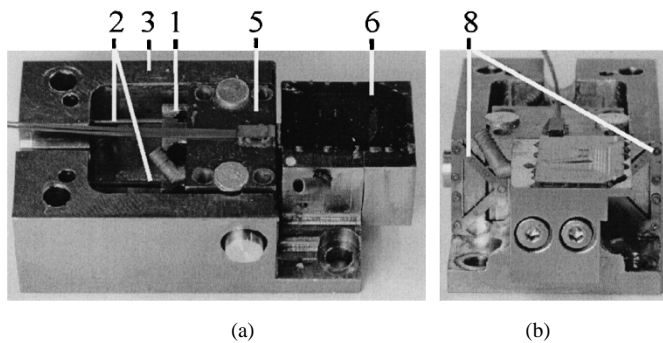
(a) Side view and (b) front view of the realized design for fiber-array pigtailling. The design consists of a solid U-shaped frame (3) and PIC mounting platform (6). The fiber array is mounted on the fiber array mounting platform (5), which is stacked on the fiber-array alignment submount (FAS) (1). This is connected to the solid U-shaped frame by three pins (2) (only two pins are visible). Alignment is possible by welding precisely chosen positions on the tuning frames (8).
